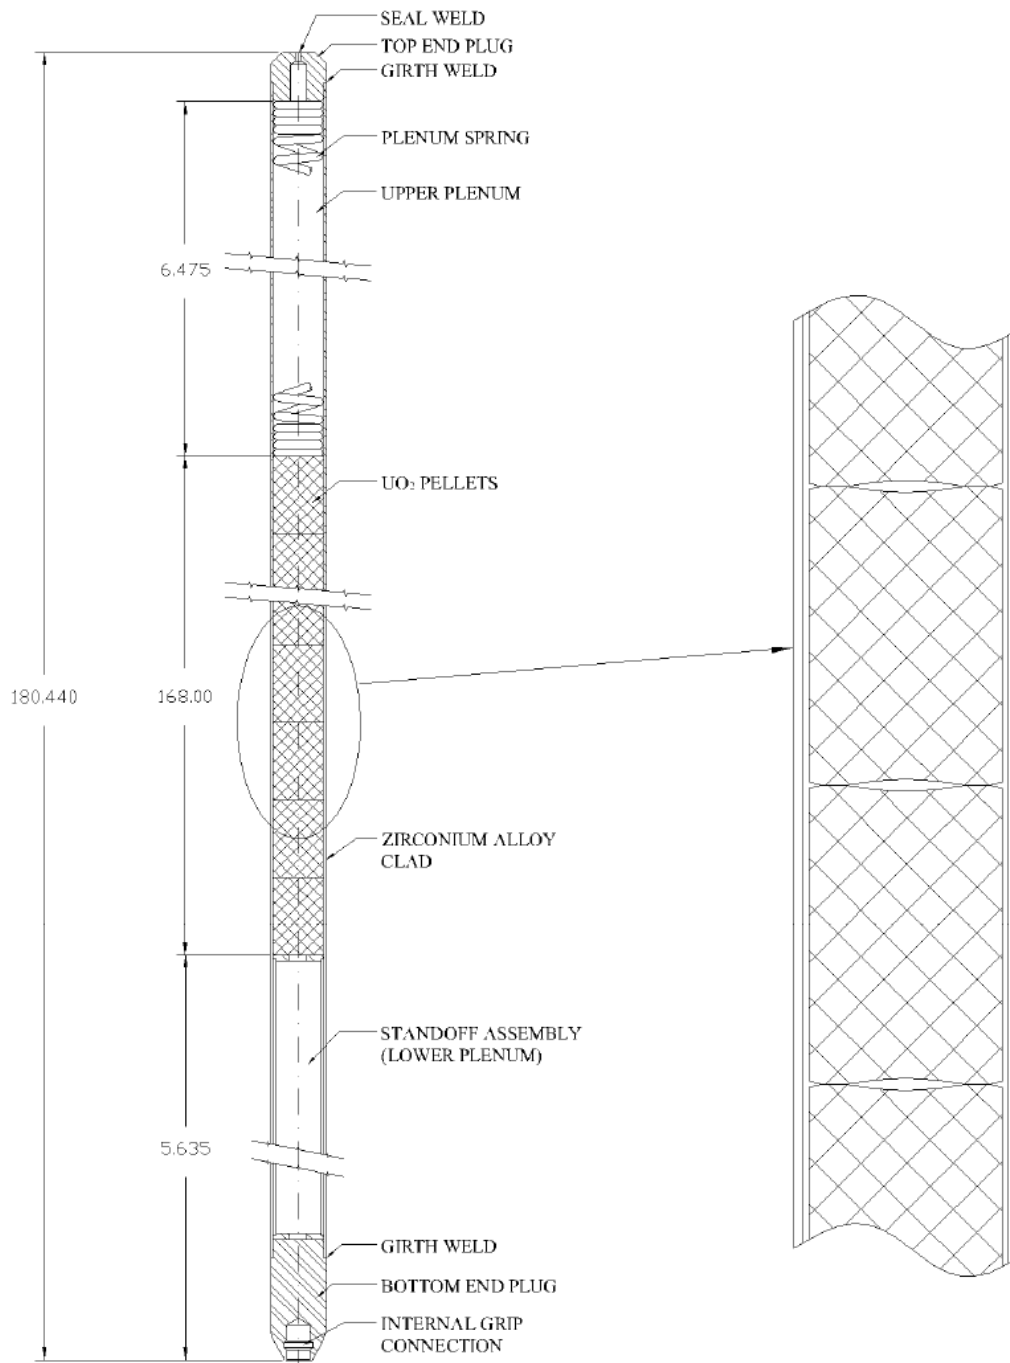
AP1000 Fuel Rod, dimensions in inches [17]
